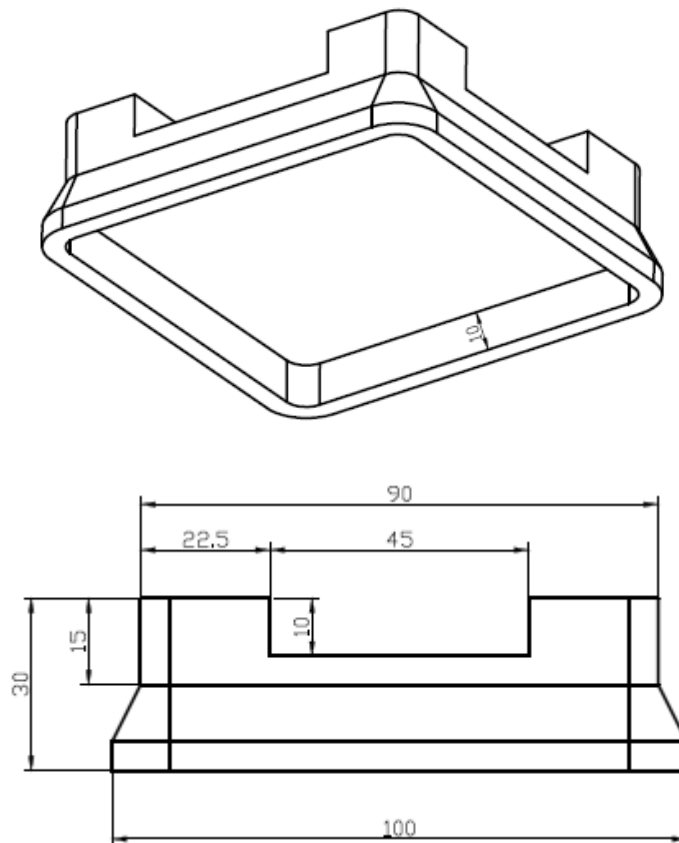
Isometric (Top) and Elevation (Bottom) Drawings of Biform Joist Mount Provided by The Client
